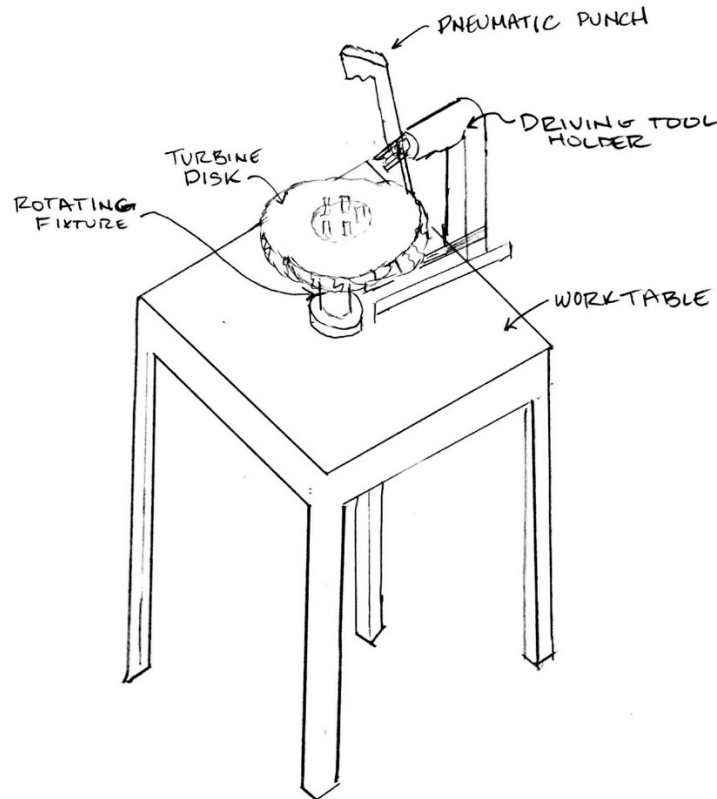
A preliminary sketch of the table based tool with rotating disk mount.
